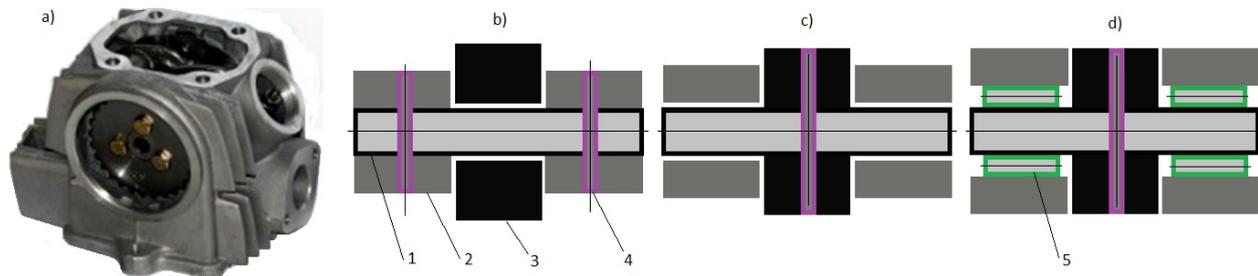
a) valve train of Benzer 50cc four-stroke engine [23], b) scheme for the original rocker arm slide bearing, c) scheme for the modified rocker arm slide bearing, d) scheme for the modified rocker arm needle roller bearing; 1 – axis, 2 – cylinder head, 3 – rocker arm, 4 – fixing pin, 5 – needle roller. Source for a), b) and c) – own investigations
